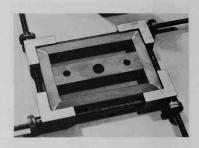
Using a miter-frame clamp to assemble the sides and ends,
